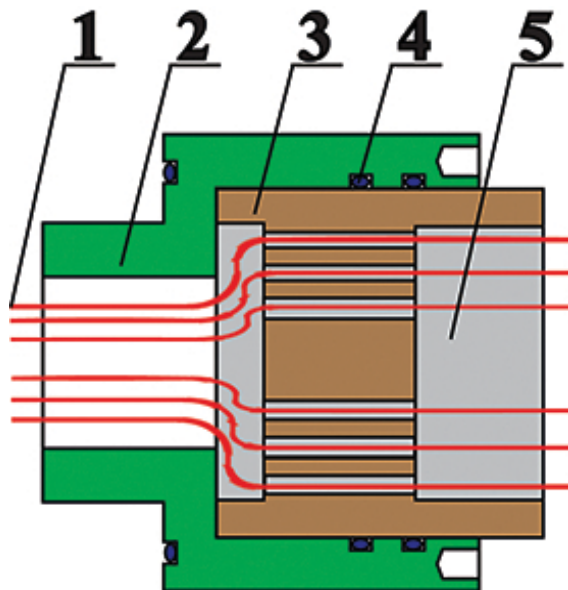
Sealing plug: (1) test wires; (2) sealing plug body; (3) sealing plug core; (4) seal rings and (5) sealing glue.
